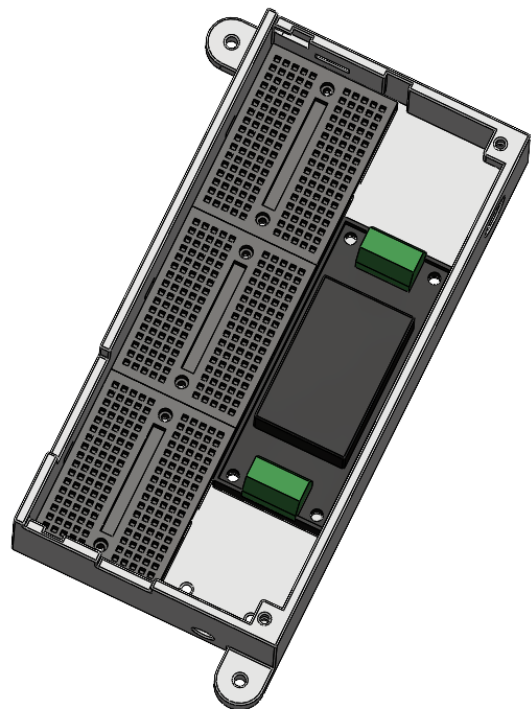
5 V regulator mounted in the Electrical Enclosure.
